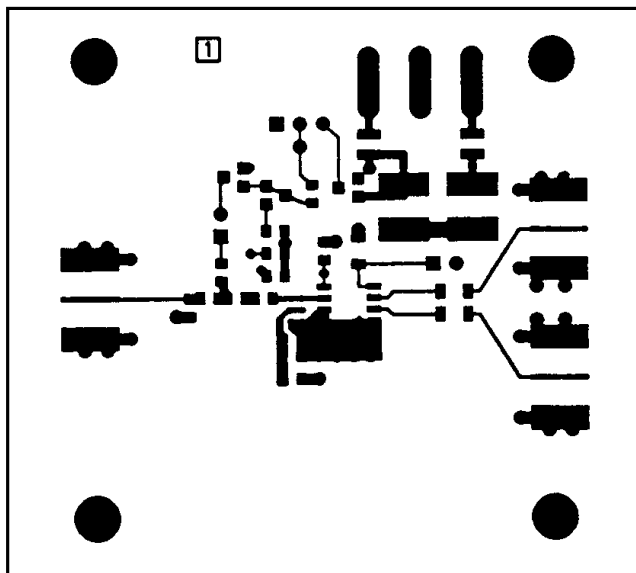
MAX3760 EV Kit PC Board Layout—Component Side
